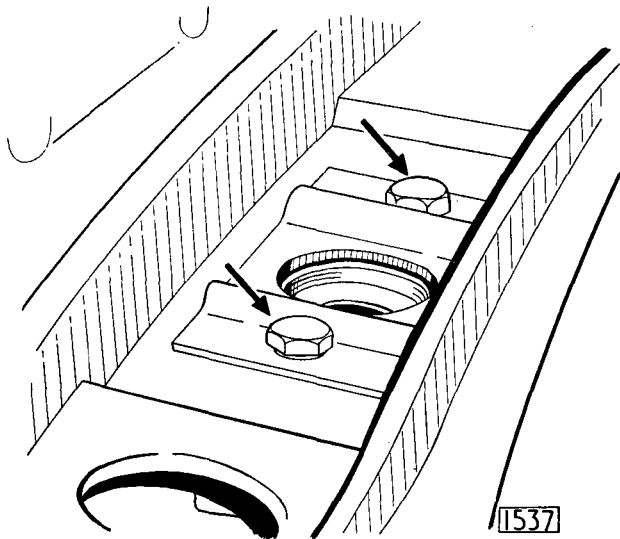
Showing the two setscrews which secure the bonnet catch striker plate.
